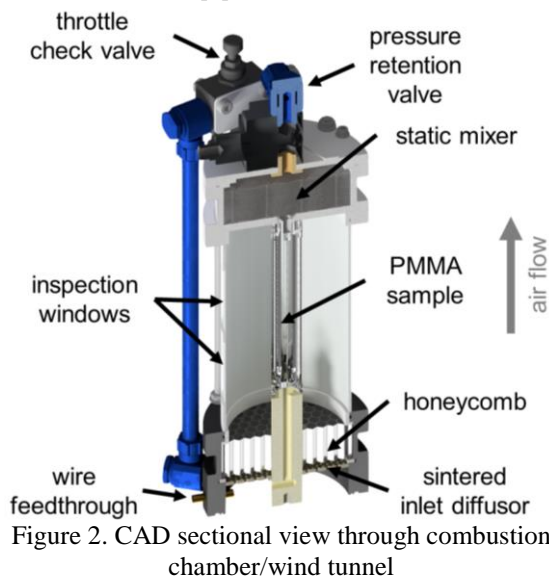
CAD sectional view through combustion chamber/wind tunnel
